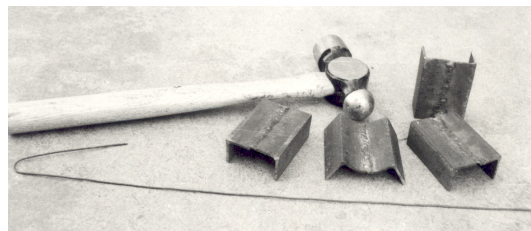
Butt welds of 30mm x 30mm x 3mm angle iron at 50 amperes current using the single carbon electrode and 2mm bare iron wire as filler rod. Note the fast cooling beads seen here are a bit rougher than the slower cooling slag covered beads one associates with electric arc welding using flux-covered electrodes.
